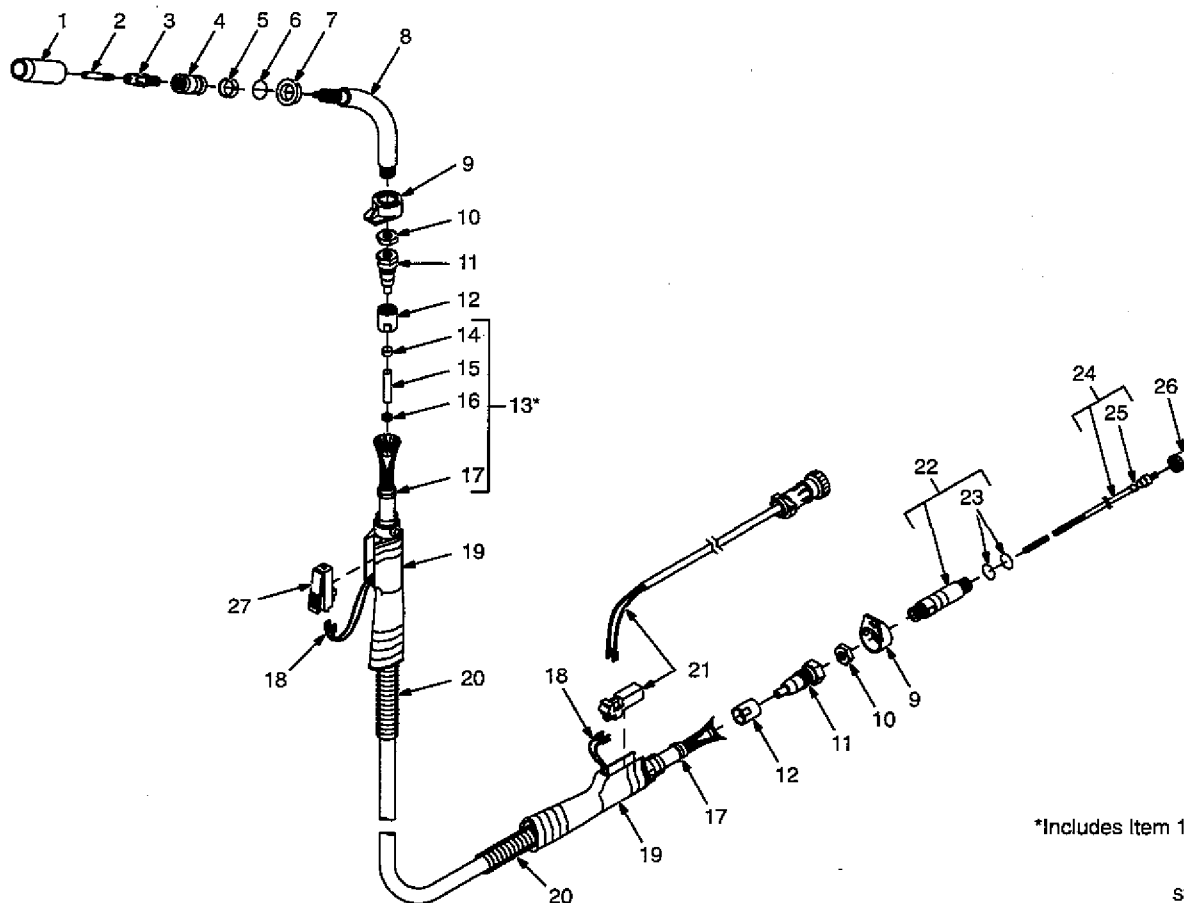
M-25 & M-25M Gun (M-25 Model Illustrated)
